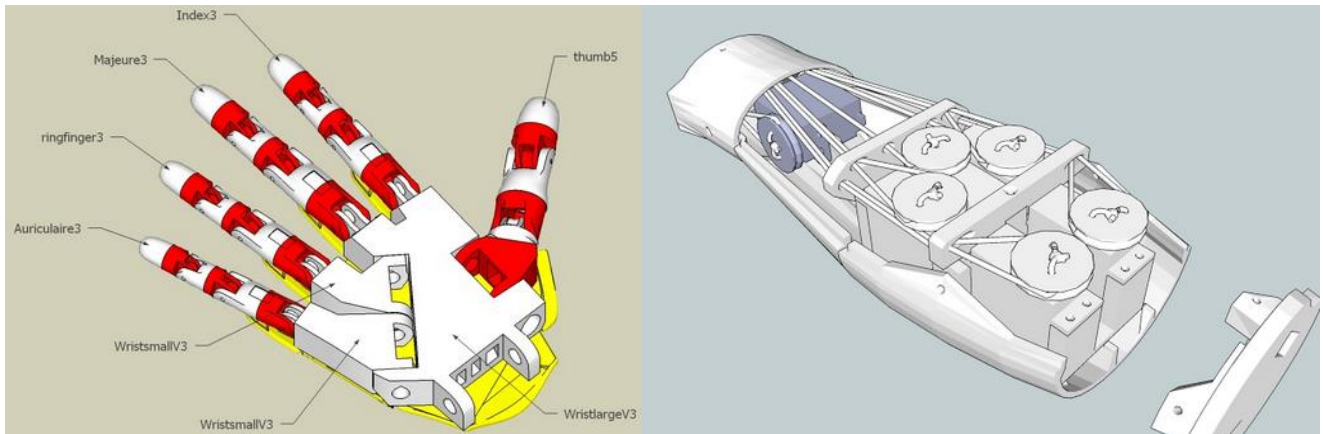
Design of 3D printed hand and forearm (courtesy InMoov Project)
